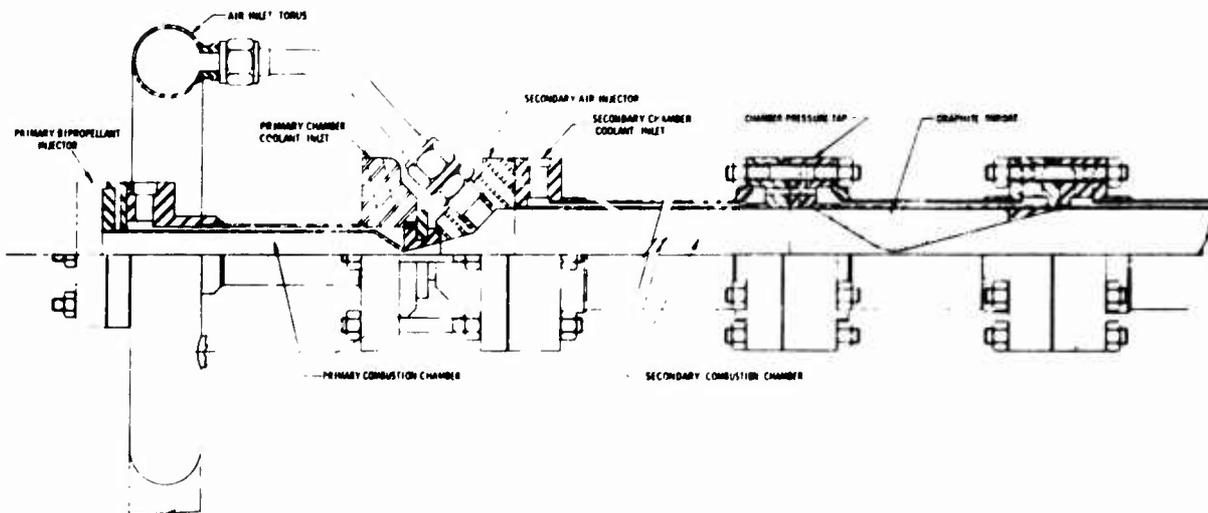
MICROMOTOR A ENGINE ASSEMBLY, AA MOD 1
